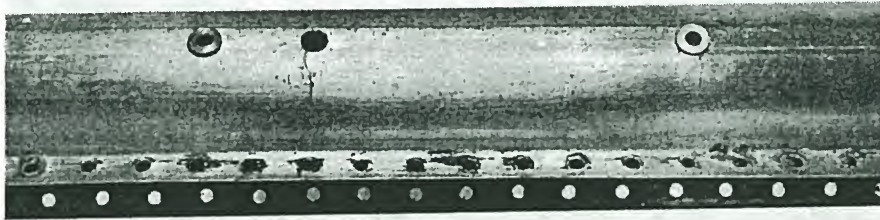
STRESS AND CORROSION CRACKS IN HIGH-TENSILE STAINLESS STEEL SPAR FLANGE
